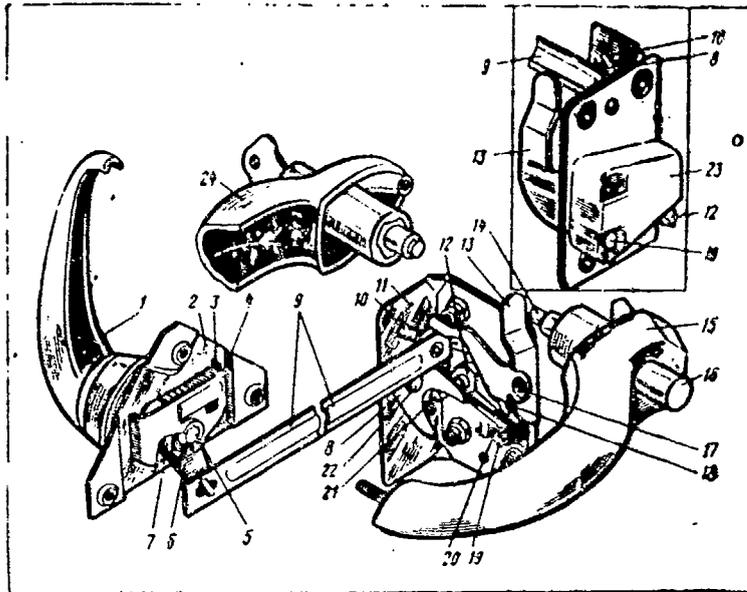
Door Lock of ZIL-130 and ZIL-131: 1, inside door handle; 2, door handle mechanism body; 3, coil spring; 4, spring cover; 5, lock drive mechanism axis; 6, lock drive lever; 7, coil drive spring; 8, door lock guide; 9, lock drive member; 10, door lock guide positioning spring; 11, lock body; 12, lock detent; 13, lock lever; 14, button shaft; 15, outside door handle; 16, door handle button; 17, door lock lever axis; 18, lever support; 19, detent axis; 20, detent axis spring; 21, spring support; 22, guide axis; 23, wedge; 24, right outer door handle with ignition switch
